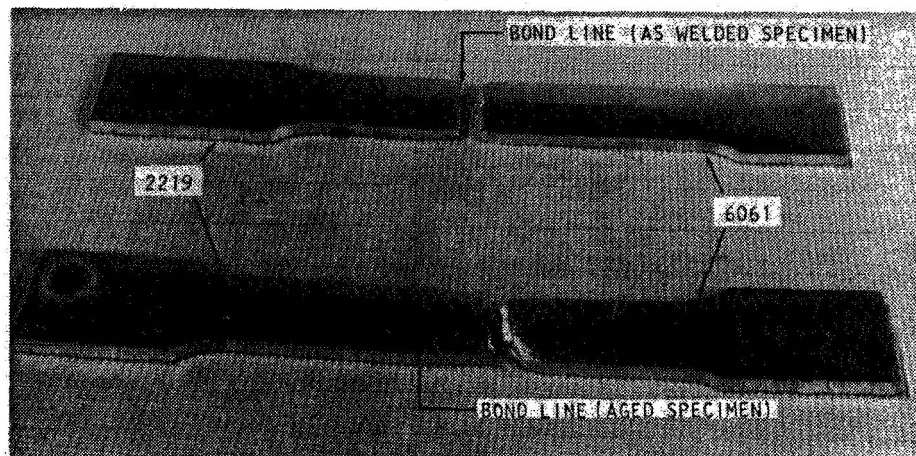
Inertia Welded Tensile Specimens, 2219 to 6061
